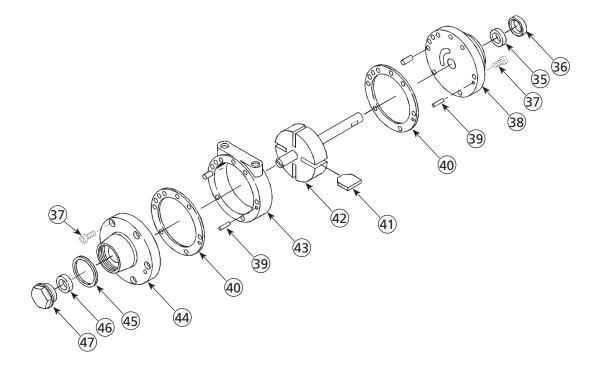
31-393 GEAR DRIVE WITH AIR MOTOR
